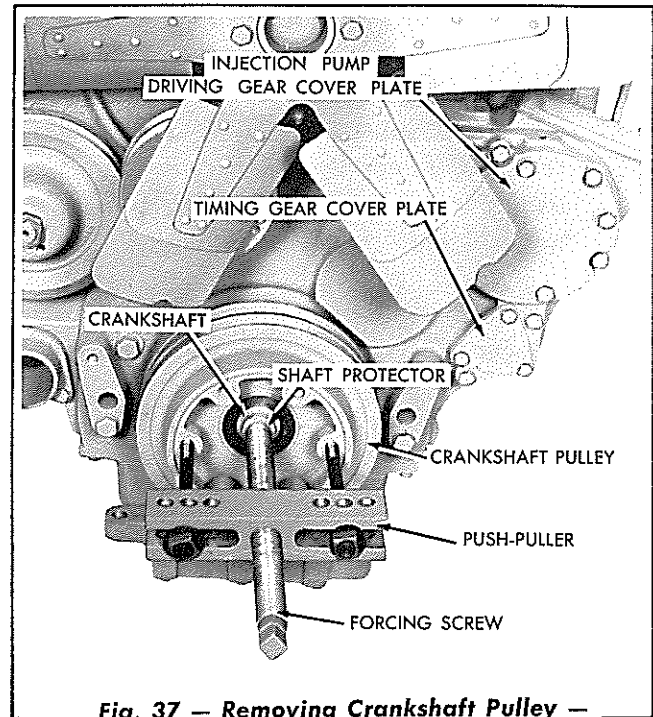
Removing Crankshaft Pulley — Engine Removed
